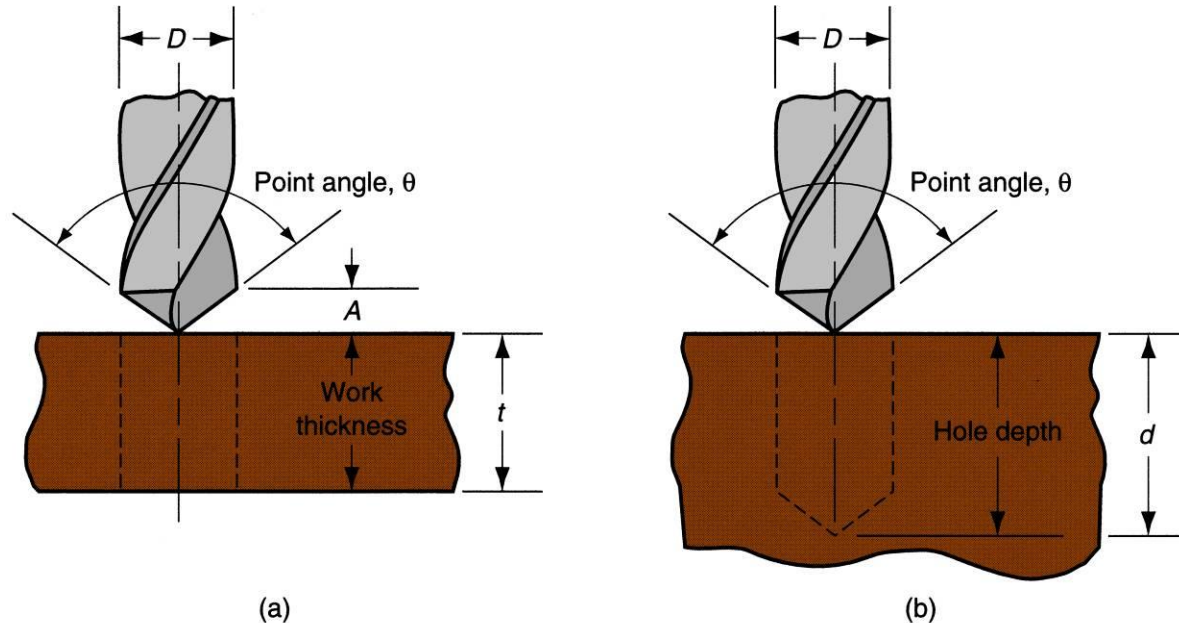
Two hole types: (a) through-hole, and (b) blind hole.
